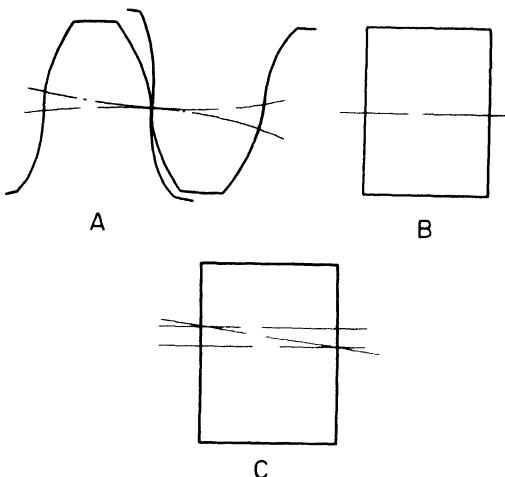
(A) A pair of mating gears for which the line of contact across the teeth of the gears is properly parallel with the axis. (B) Side view of line of contact described in (A). (C) Side view showing improper line of contact resulting if either or both of the gears wobble or weave as they revolve.
